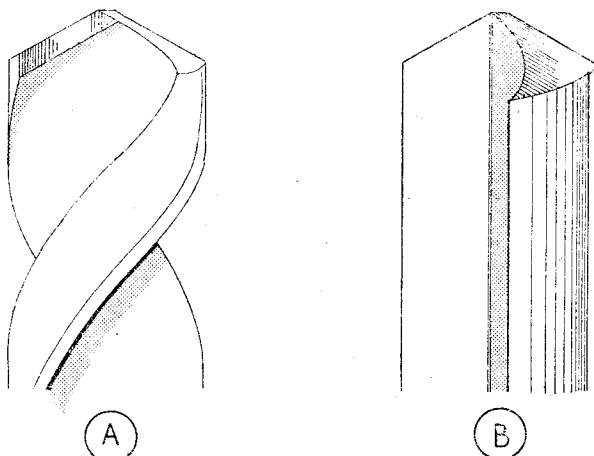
Drills for bronze. "A"—a twist drill with the rake removed; "B"—a straight-flute drill
